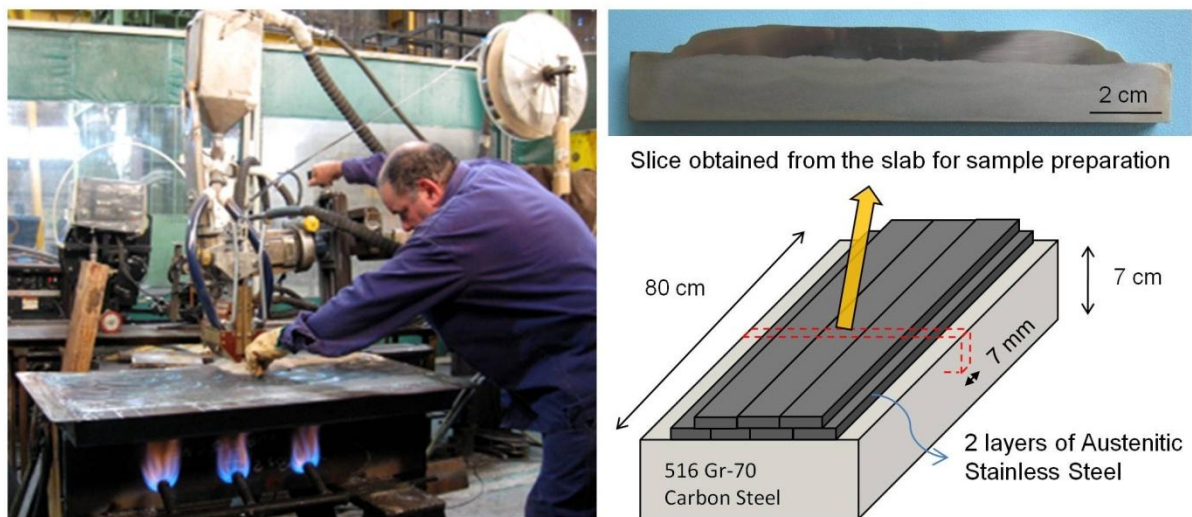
Fabrication of welding coupons by submerged arc welding showing location of the slices used for sample preparation
